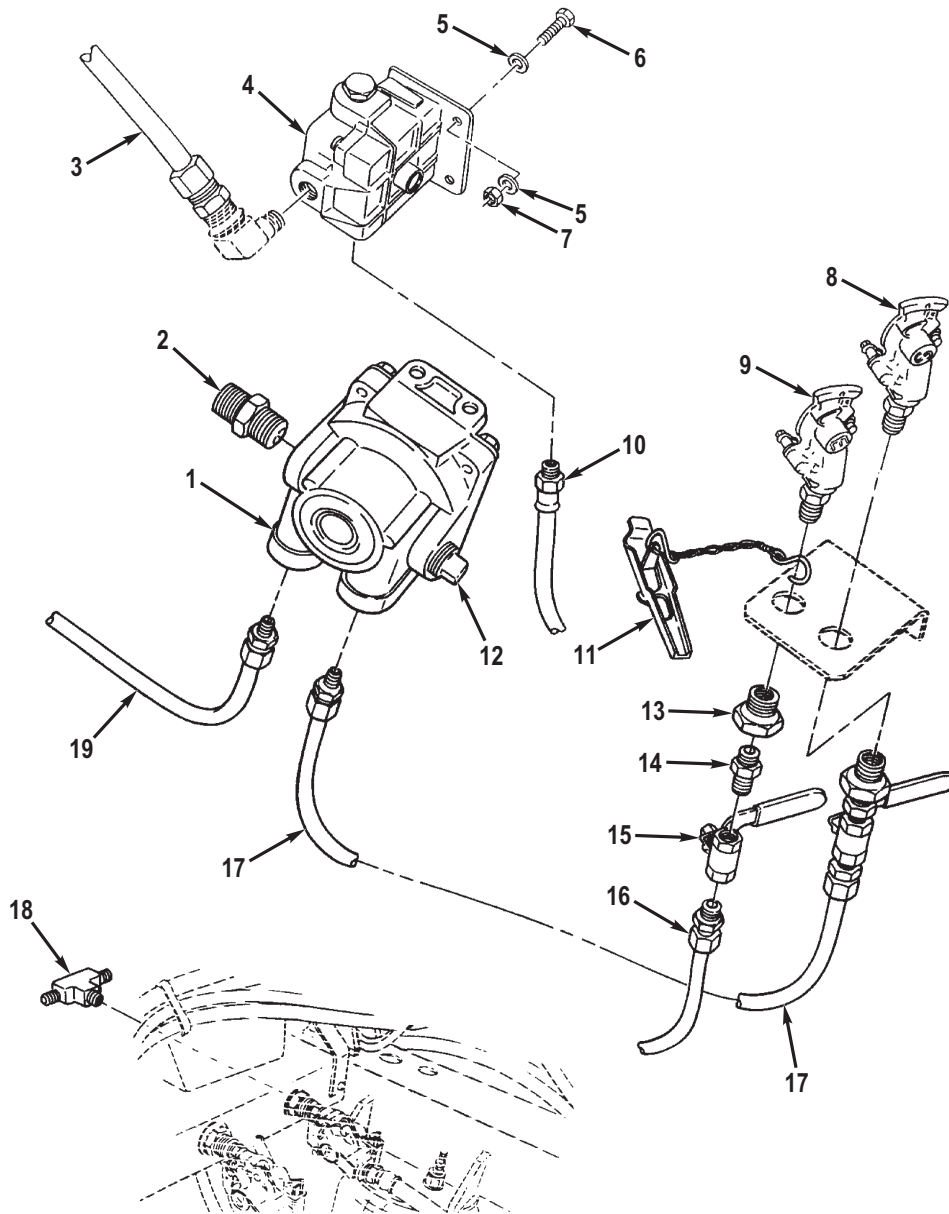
Air Brake Chambers, Lines, and Fittings, Rear.
